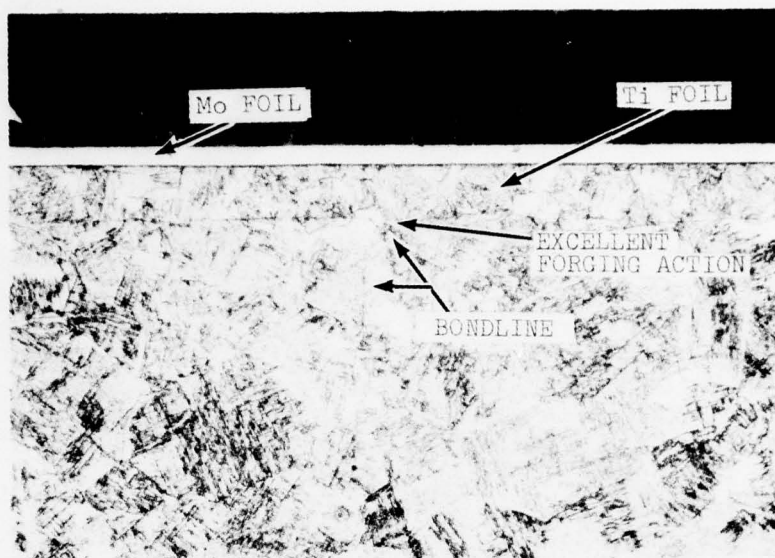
CROSS SECTION OF BOND JOINT AREA PRE-FORM TUBE S/N 6.
